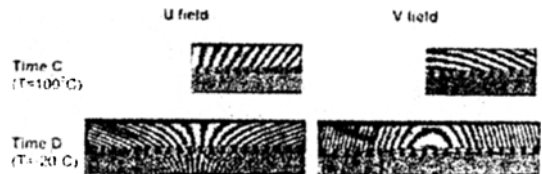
U and V displacement field patterns of the large ceramic BGA package assembly (CBGA 19)
